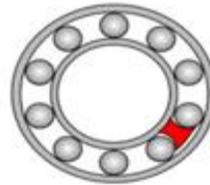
Rolling elements bearing damage. (Pruftechnik 2013.)
